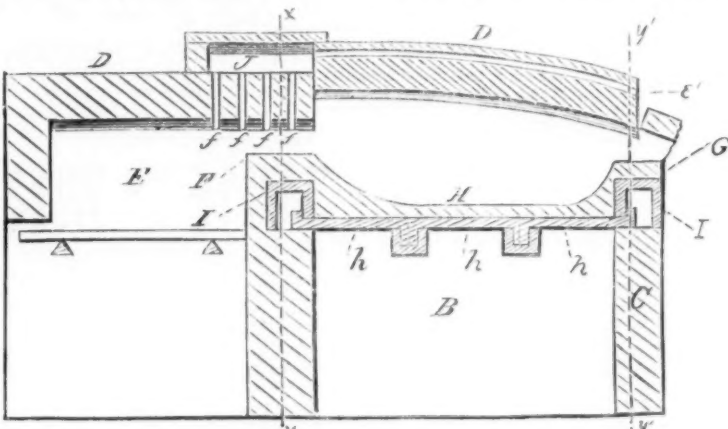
IMPROVEMENT IN THE CONSTRUCTION OF REVERBERATORY FURNACES.
